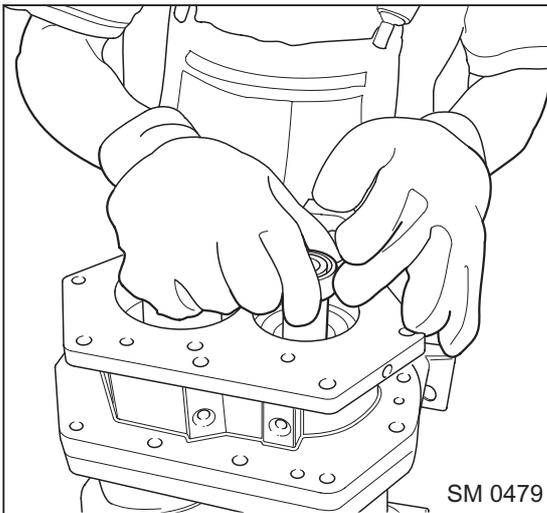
Lowering Delivery Bearing Housing Into Position
